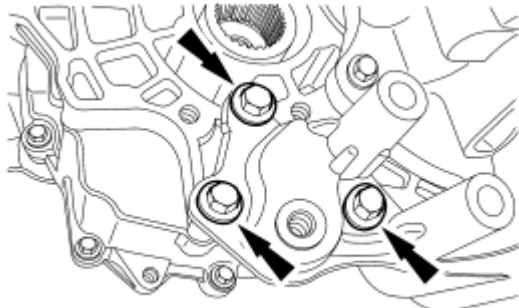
Locating Air Cleaner Assembly Bracket Bolt
